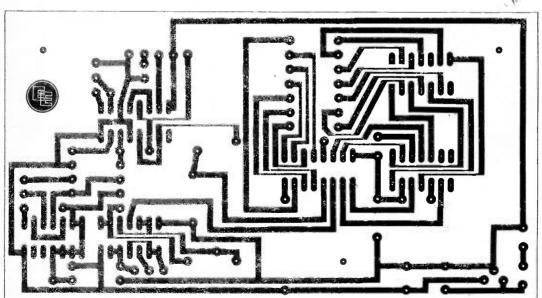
Full size printed circuit board artwork and component layout. Topside also shows interwiring details. Note that switches are shown as if the front panel had been folded flat.
